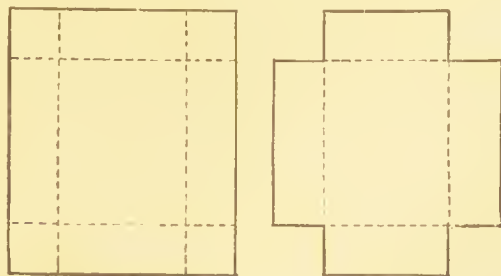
SHOWING HOW TO MAKE THE CARD TRAYS.
